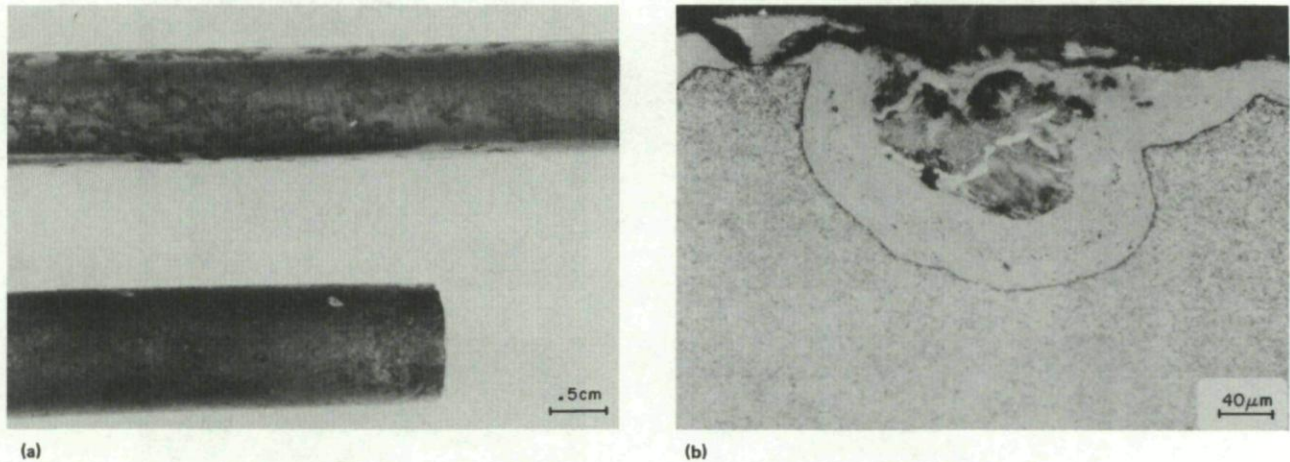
Pitting induced failure of an engine exhaust valve
